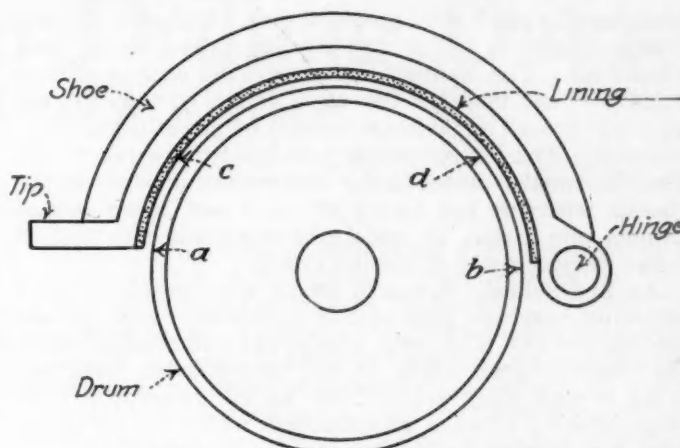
AN EXAMPLE OF FAULTY BRAKE DESIGN
